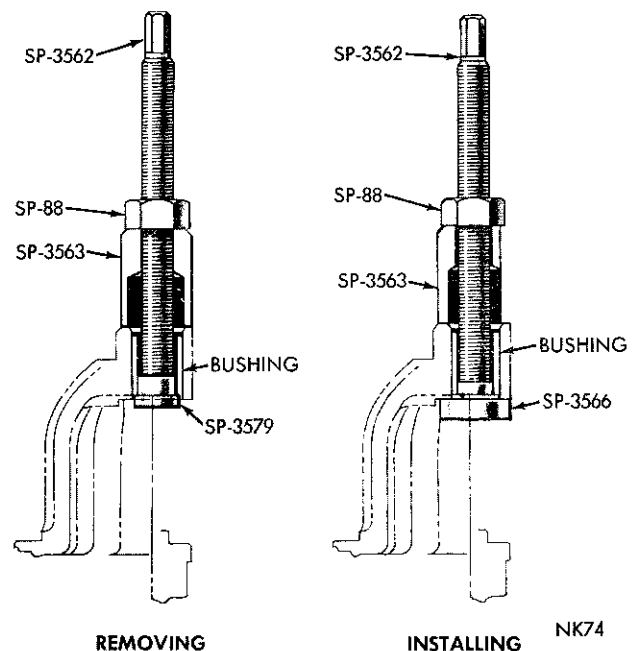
Removing and Installing the Pinion Housing End Bushing
